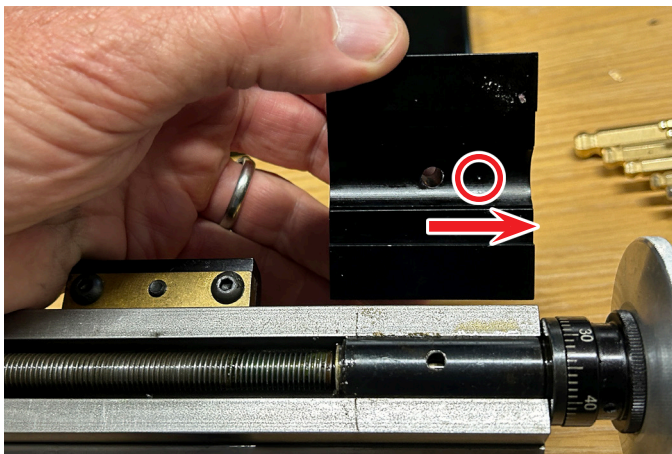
The red circles show the location of the punch mark on the tailstock end mount.
